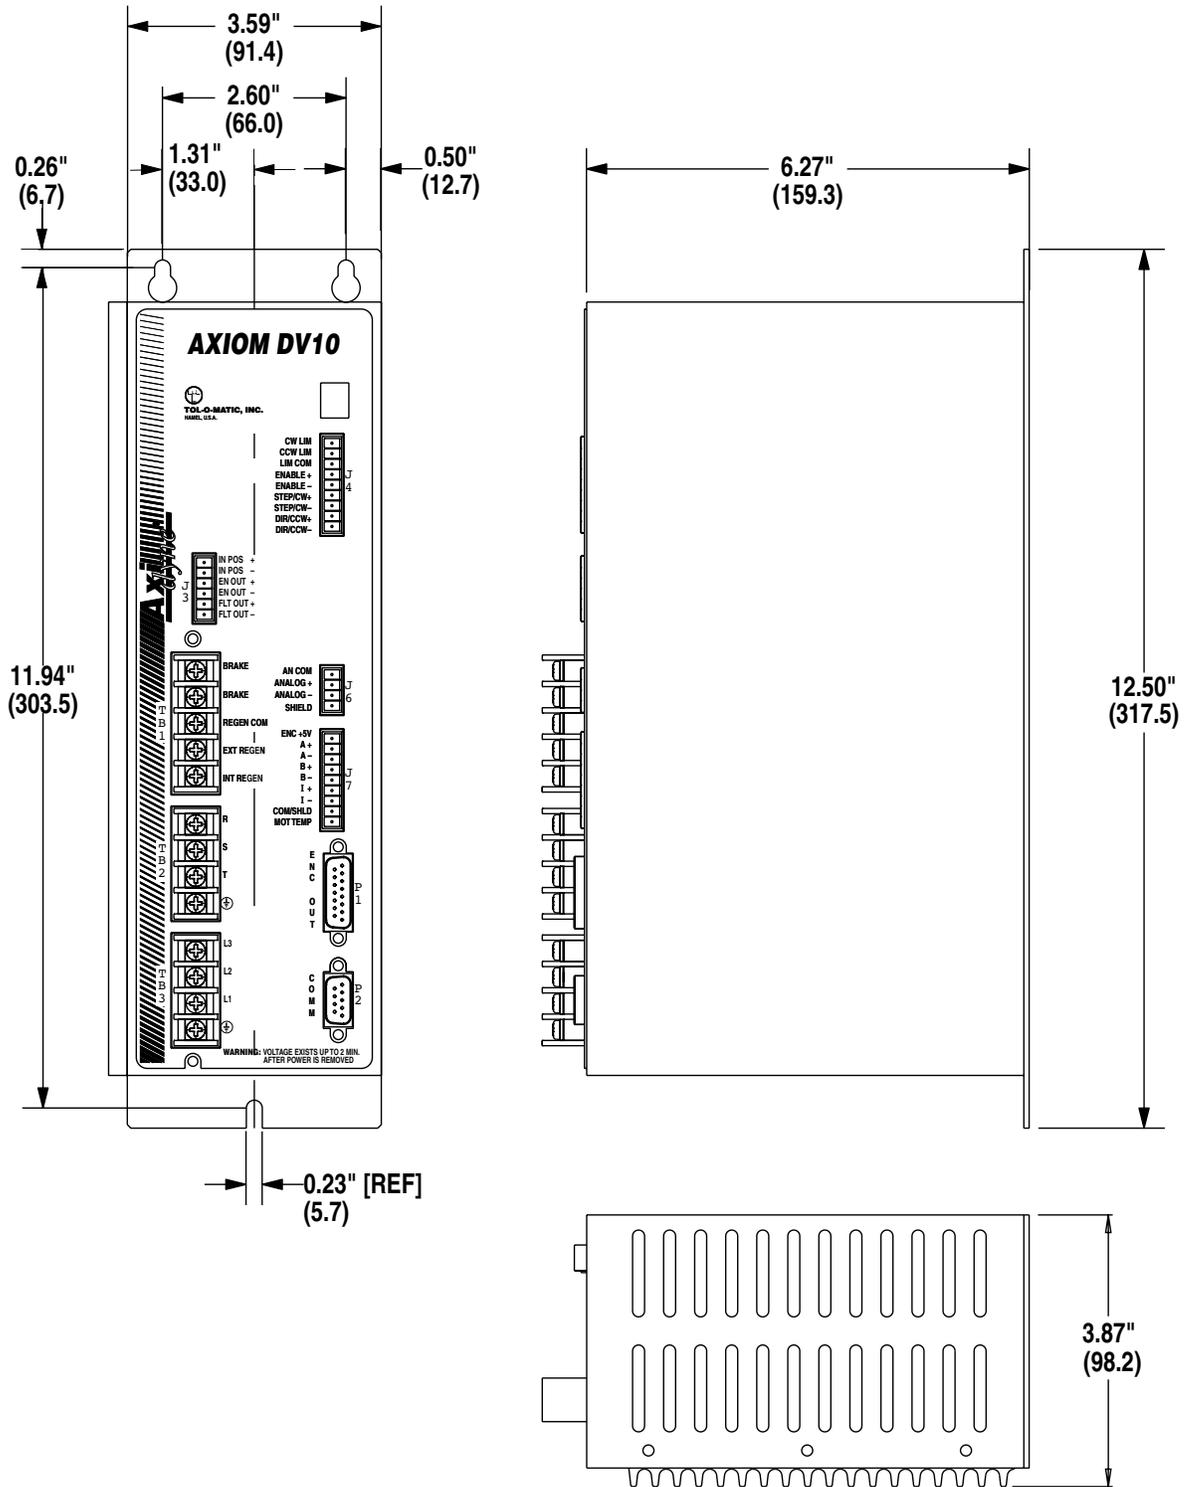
Axiom DV10 Drive Mounting Dimensions
